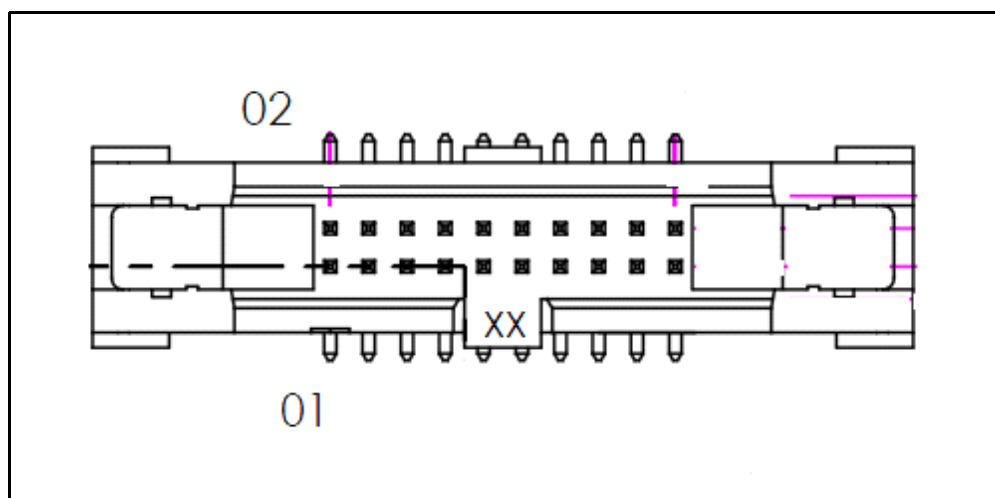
Samtec 20-Pin and 34-Pin PCB Connector
